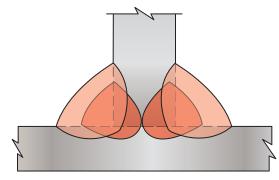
The red 1/4-in. (6-mm) fillet weld is stronger than the other fillet weld and contains approximately one-half the amount of filler metal.
